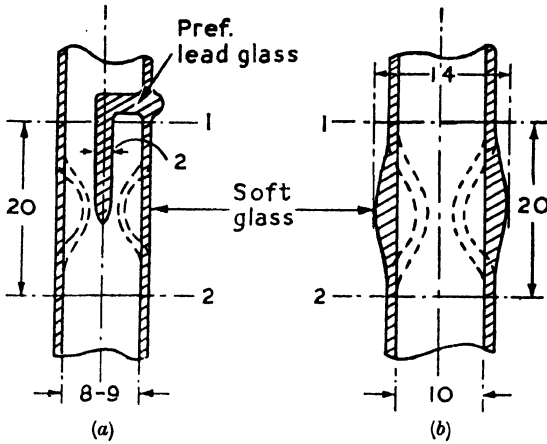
Two methods of sealing off large exhausting tubes. (Dimensions are in millimetres.)
